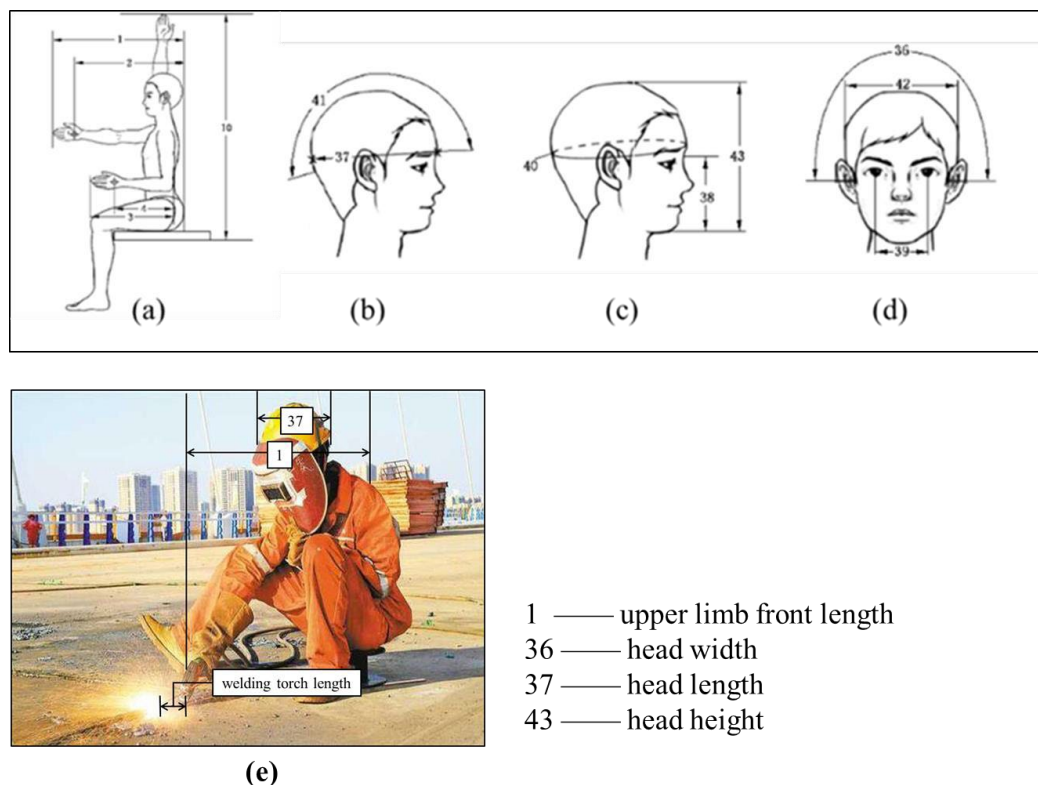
Ergonomics-Based Analysis of Welding Workspace Dimensions
